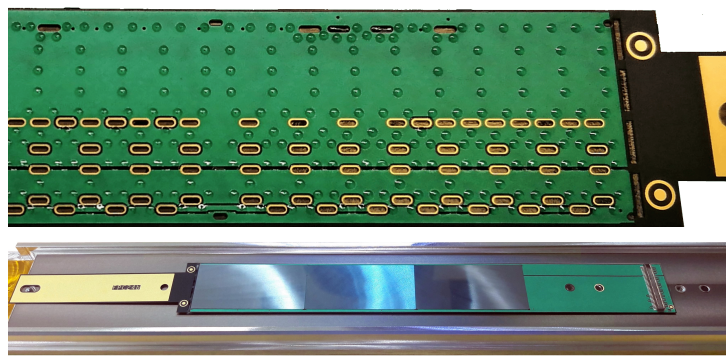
Example of an assembled MFT ladder. Upper picture: back side of the FPC with the glue spots on which the sensor are glued. Bottom picture: front view of assembled ladder.
